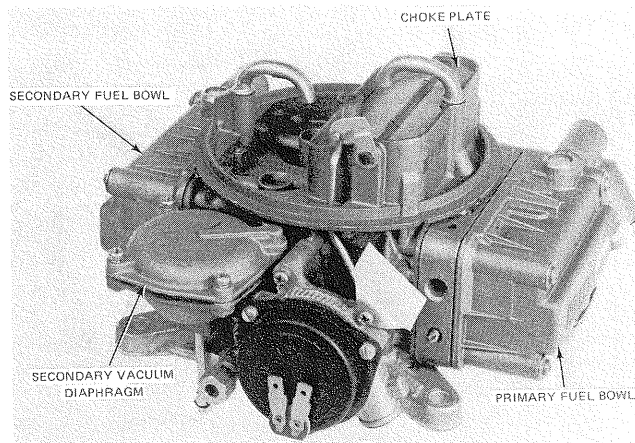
Choke Housing Side Model 4160, Internally Adjusted Needle and Seat
